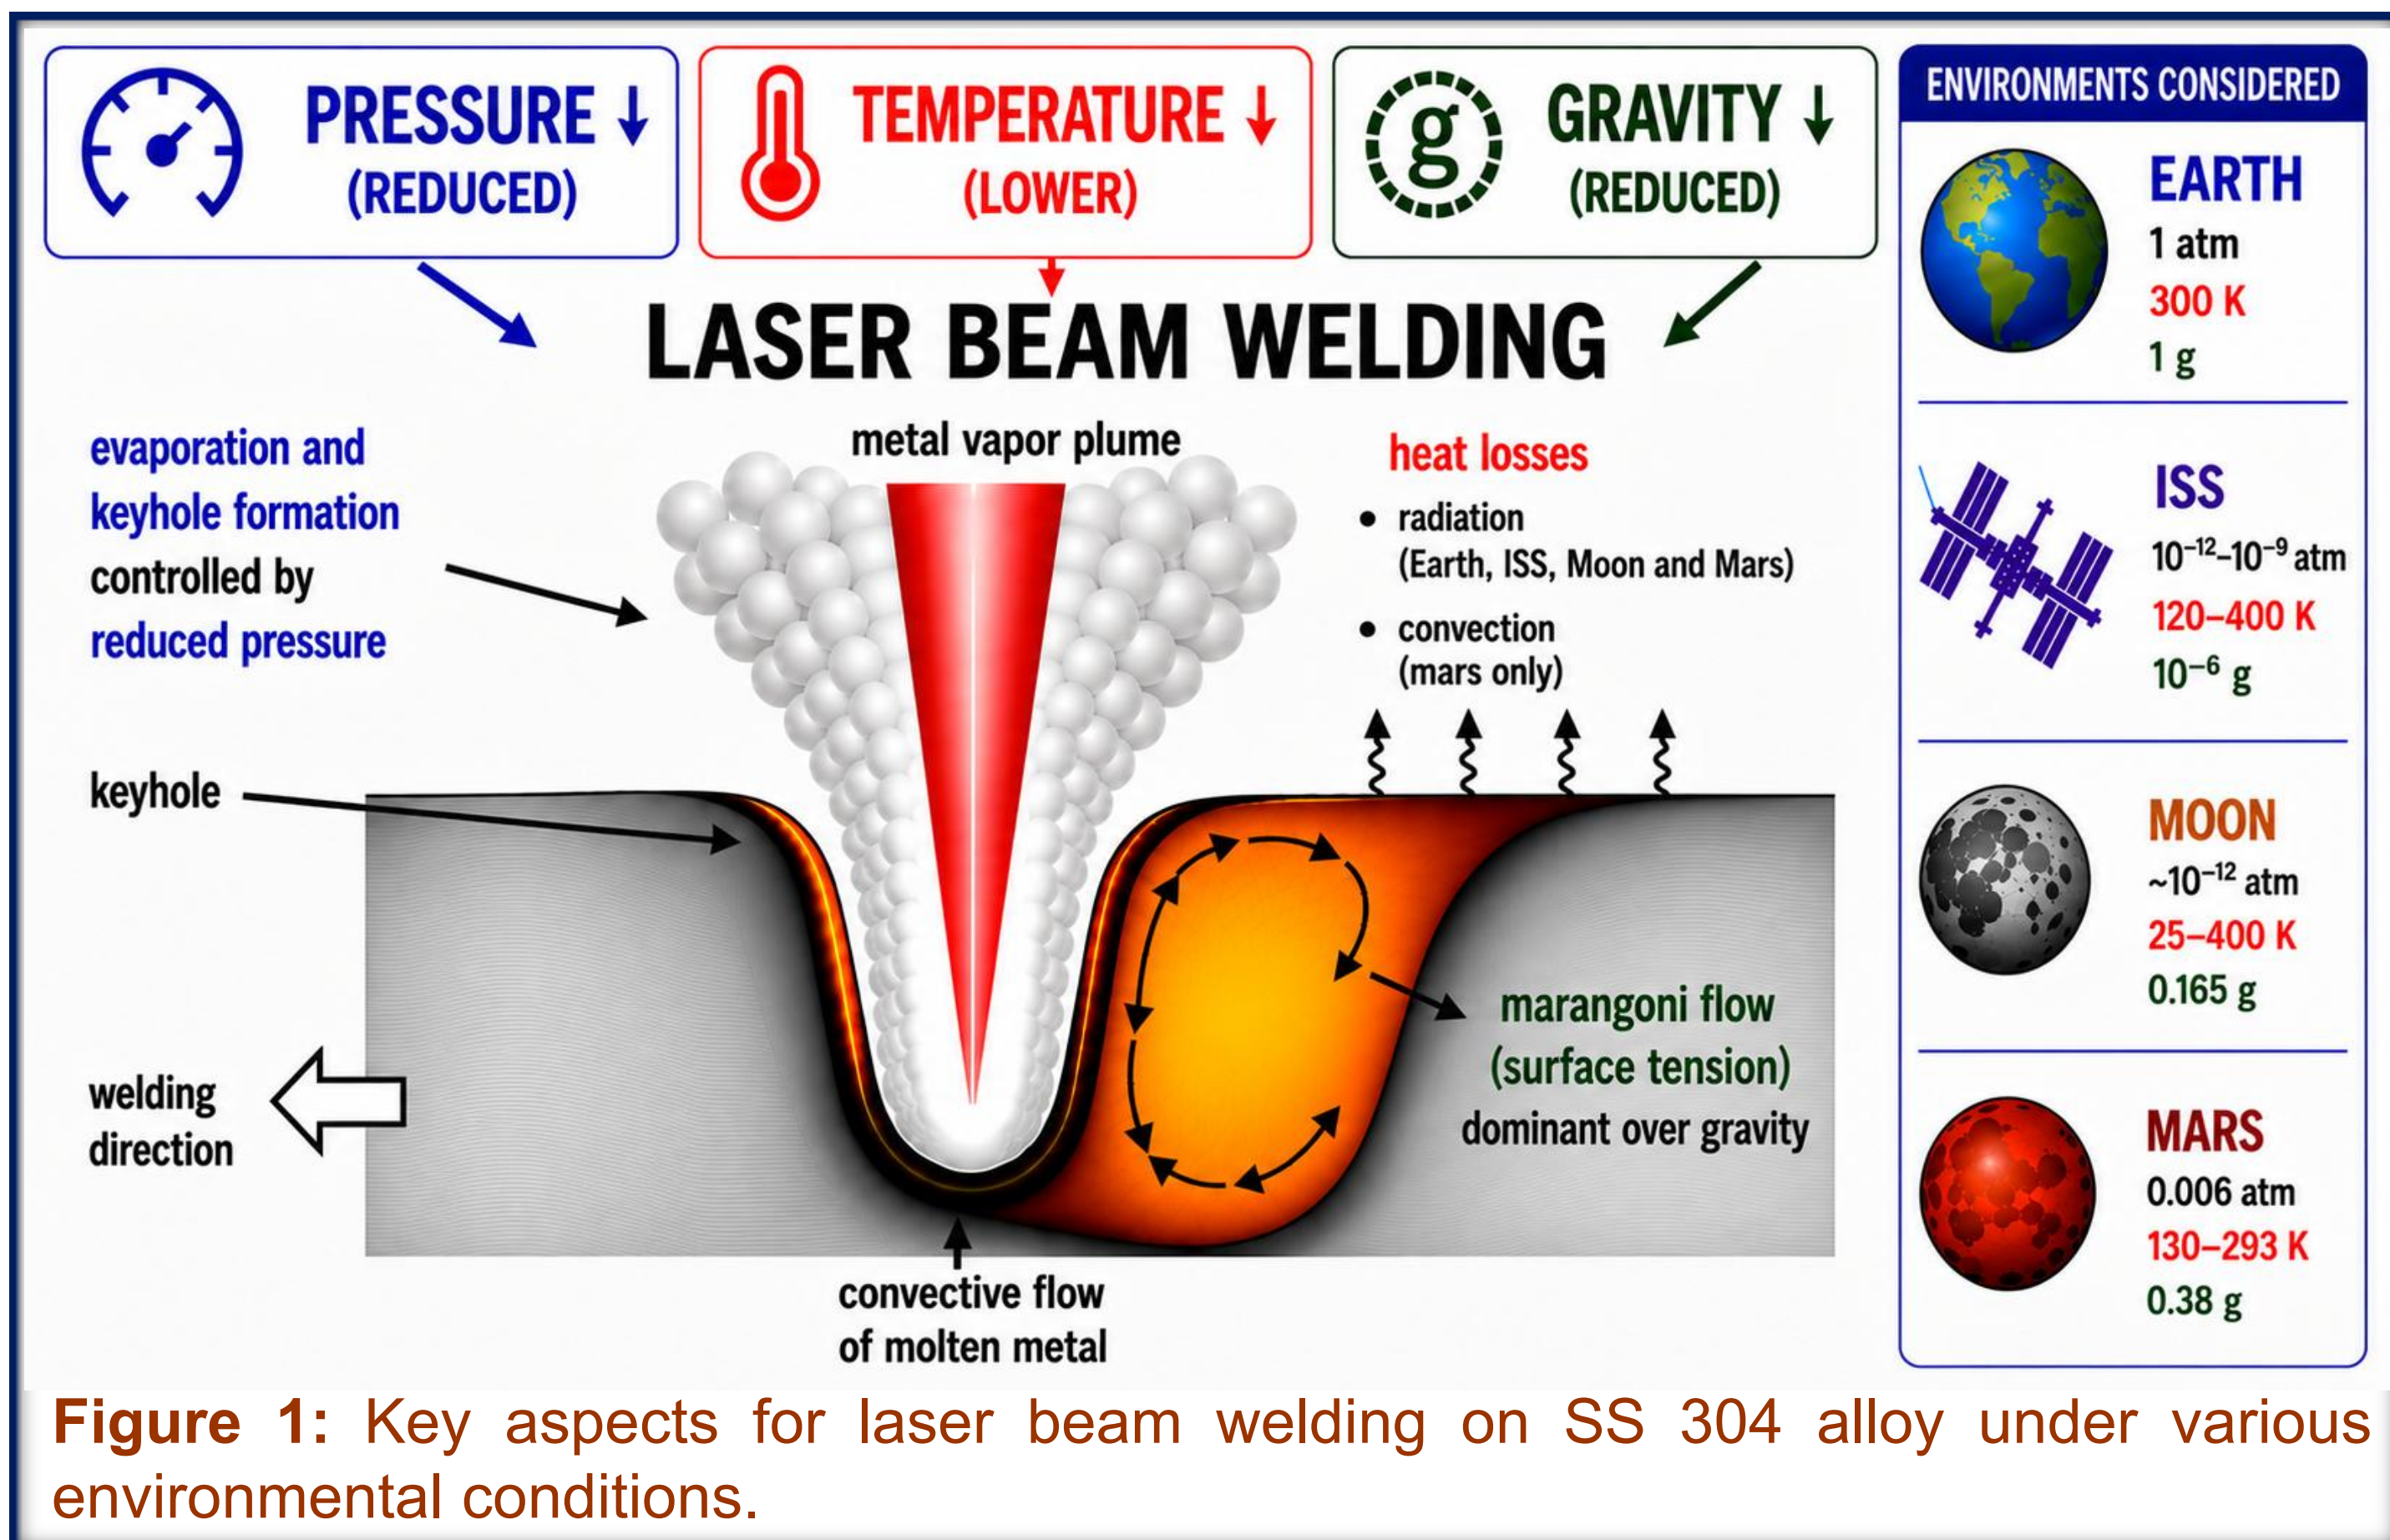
Key aspects for laser beam welding on SS 304 alloy under various environmental conditions.
